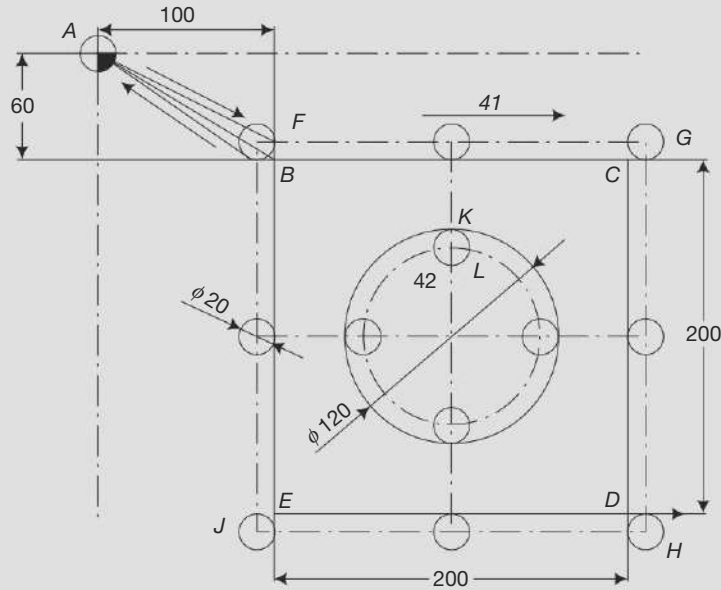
Example showing the cutter radius compensation using the G codes G41 and G42
